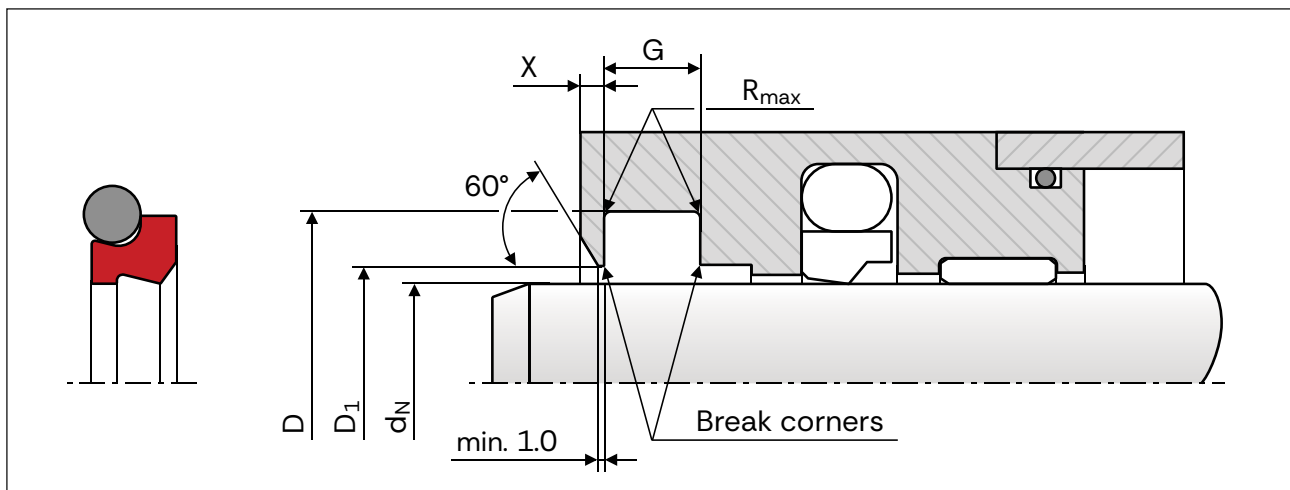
Assembly drawing for HaaScraper Heavy W98.
